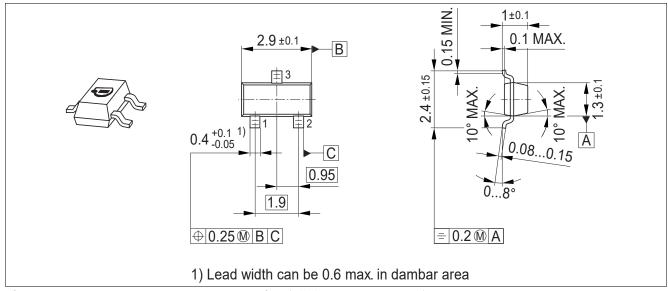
PG-SOT23-3-15 package outline (all dimensions in mm)
